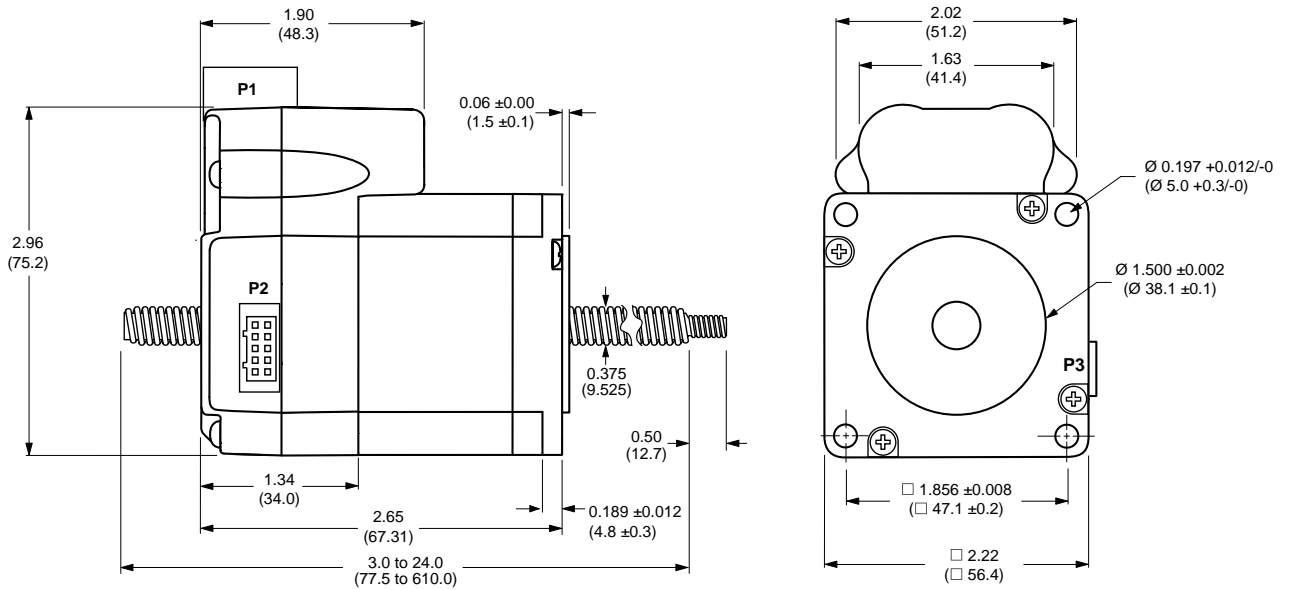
MDrive 23 Hybrid dimensions [inches (mm)]
